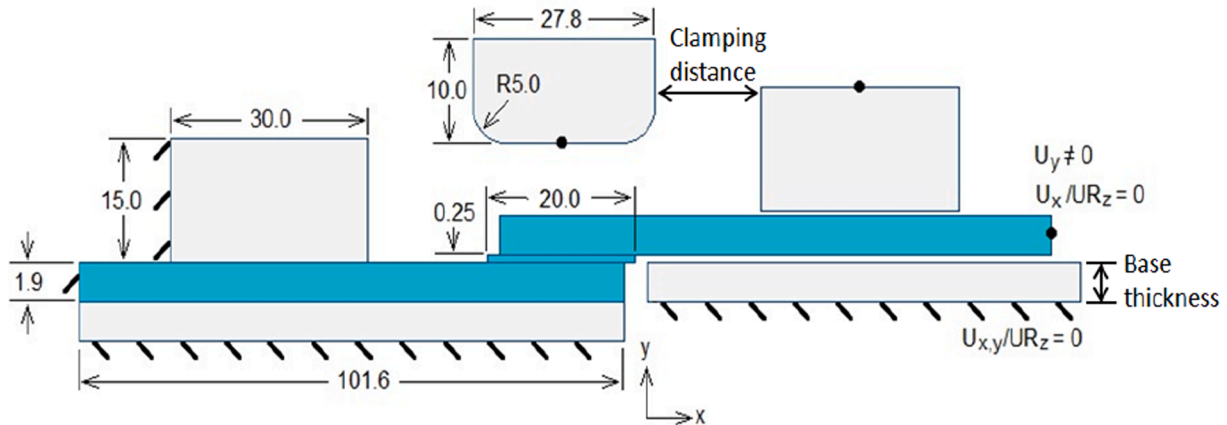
2D FEM model of the ultrasonic welding set-up with dimension of parts, boundary conditions, clamping distance (5 mm or 50 mm) and supporting base thickness (2.15 mm, 1.90 mm, 1.50 mm, 1.25 mm or 0.00 mm). Grey parts were modelled as rigid bodies while blue parts were meshed. Dimensions are in [mm].
